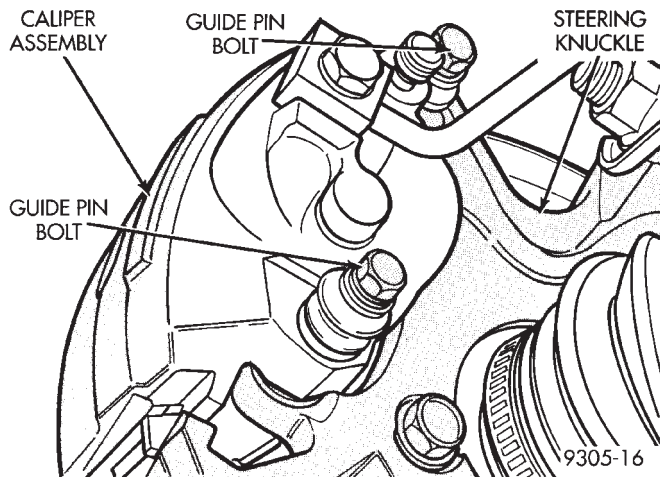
Removing Caliper Assembly Guide Pin Bolts
